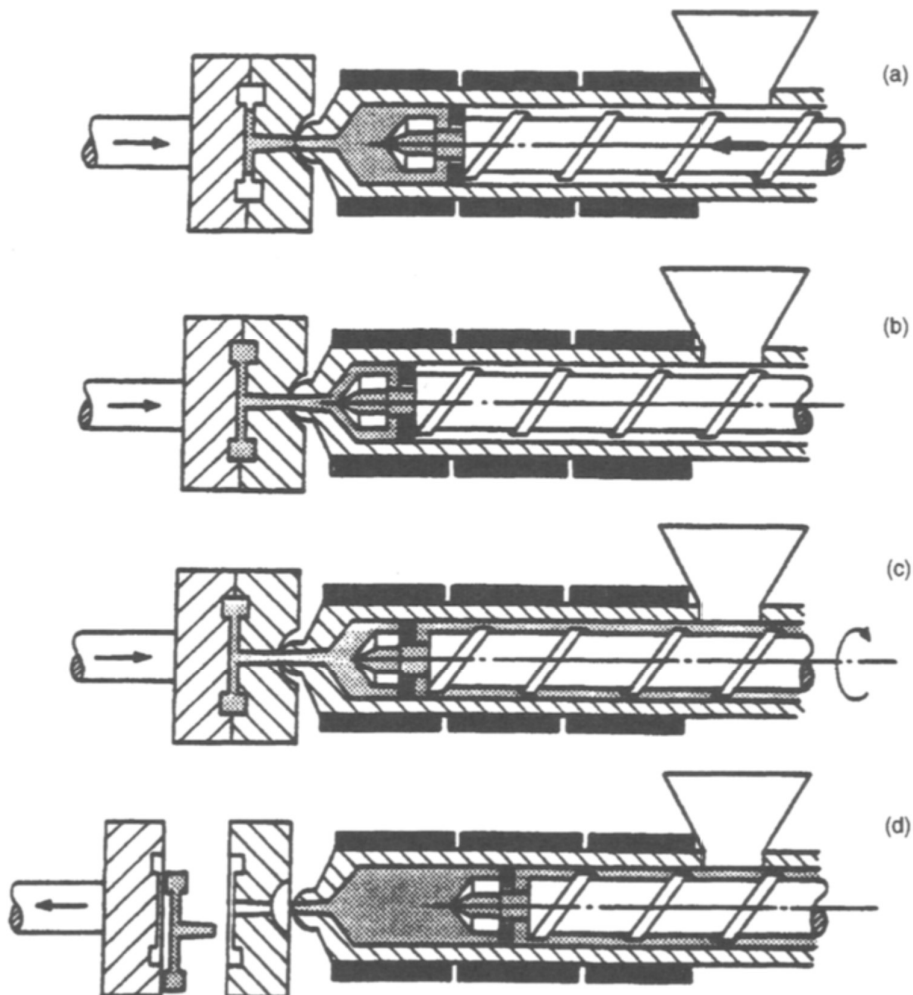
injection molding machine steps (Crawford, page 281, 1998)
